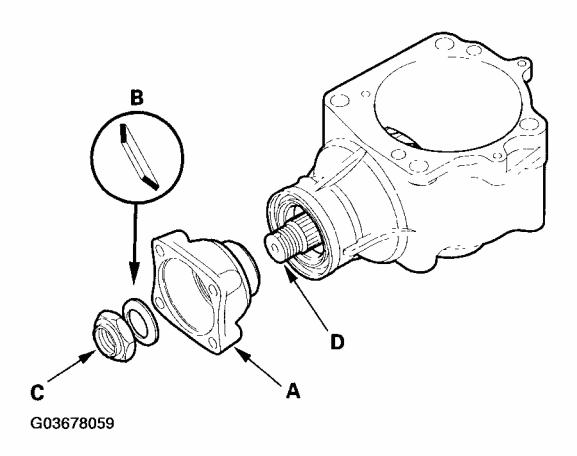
Installing Companion Flange, Conical Spring Washer, And Locknut On Transfer Driven Gear
